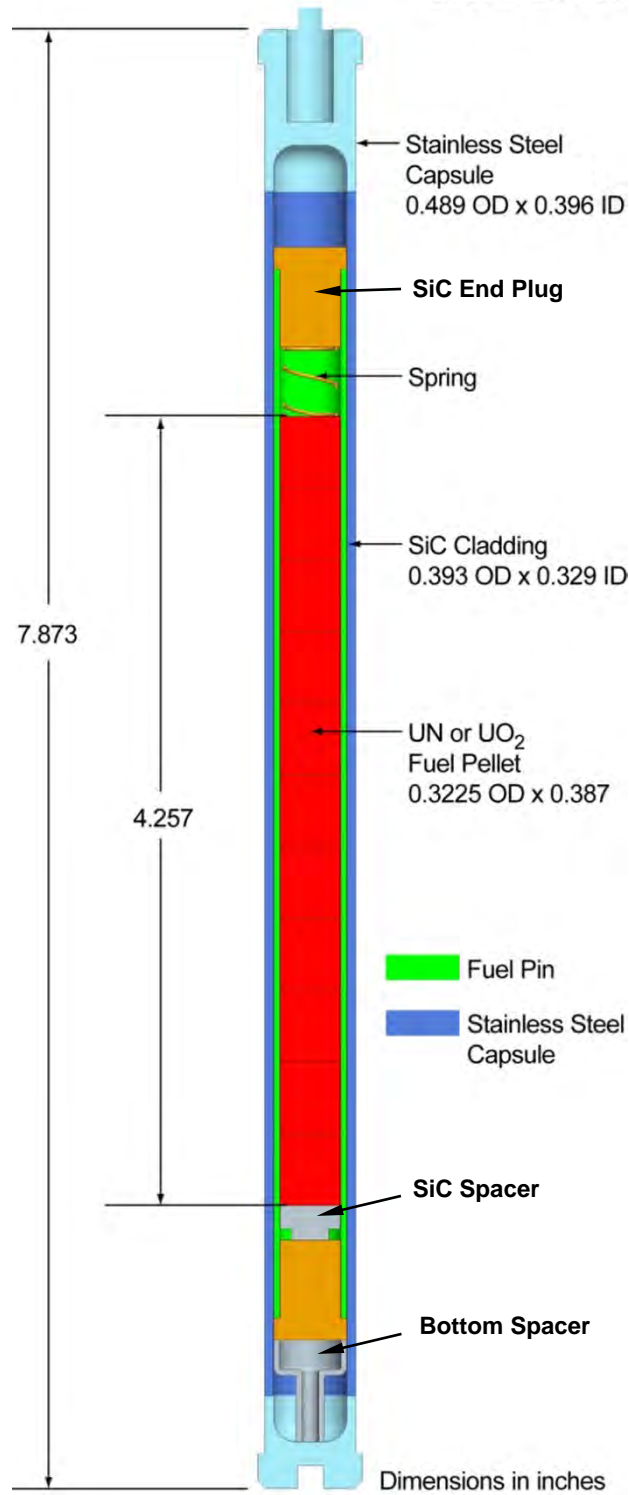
Capsule and fuel pin design. Each Capsule assembly contains one fuel pin with 10 fuel pellets (11 pellets are shown in this diagram, but 10 were used in the actual irradiation)
